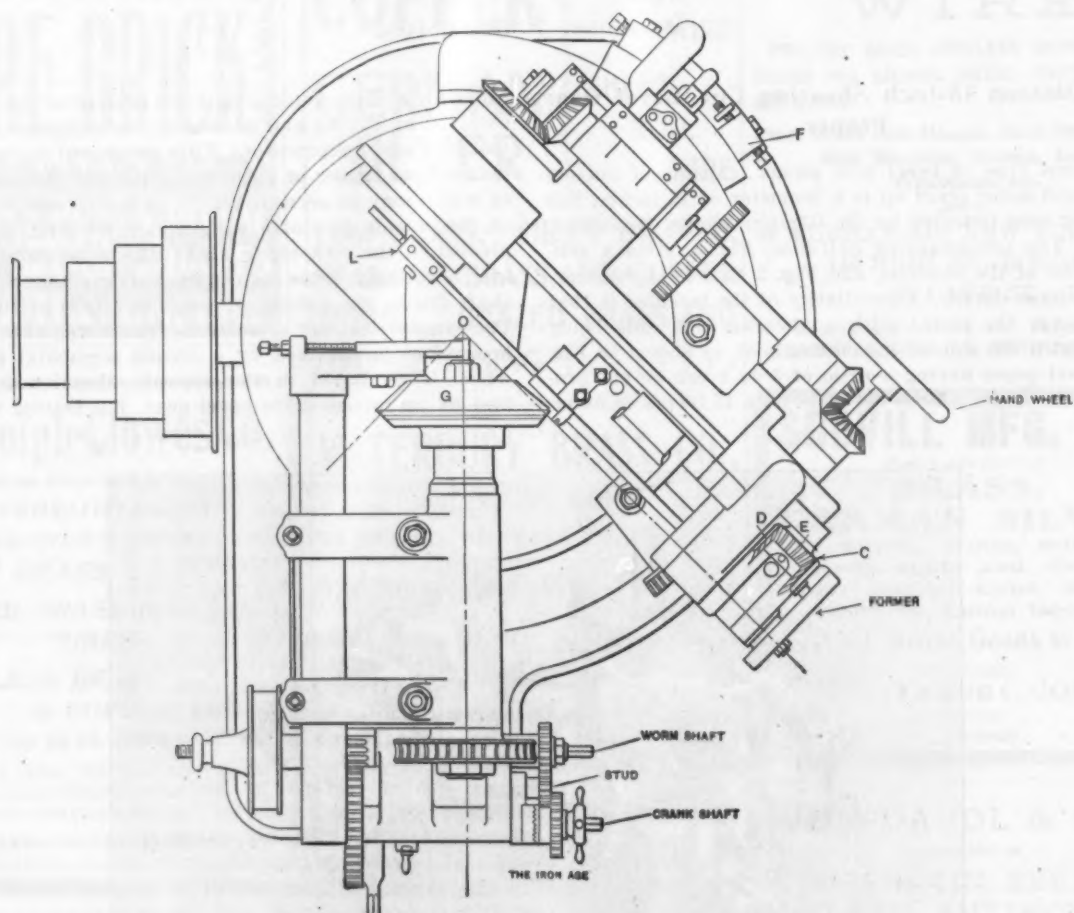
Plan View of the Bevel Gear Planer, Illustrating Its Operation.
